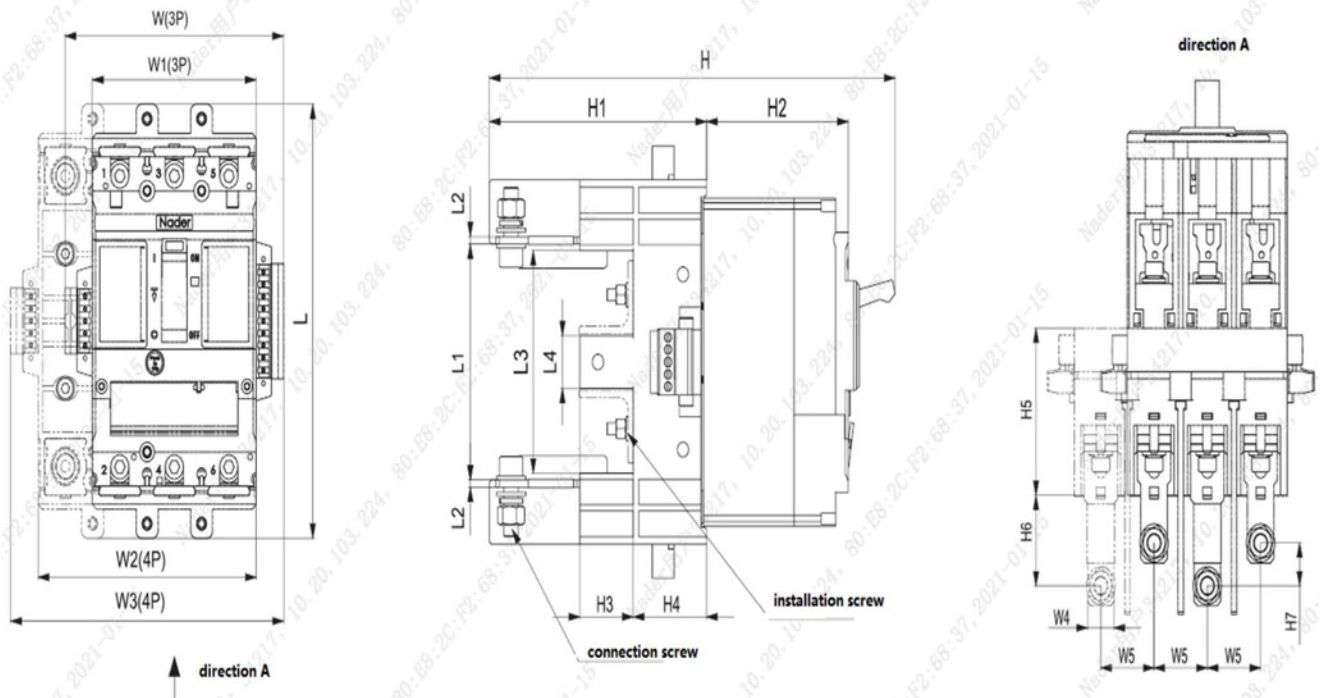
outline and installation dimensions of 3-pole and 4-pole back panel connection products with plug-in
